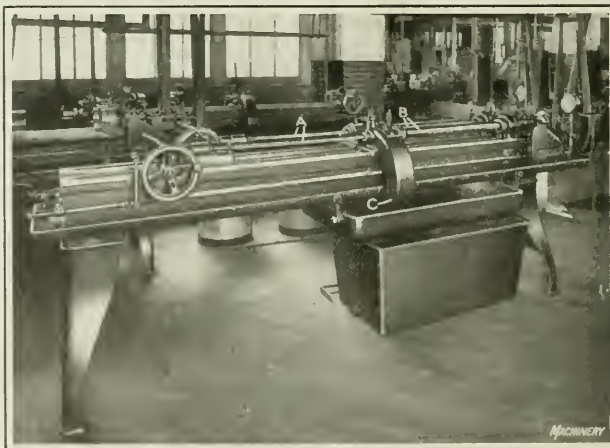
Duplex Rise-barrel Drilling Machine used for drilling an Axial Hole through the Rough Steel Bars
